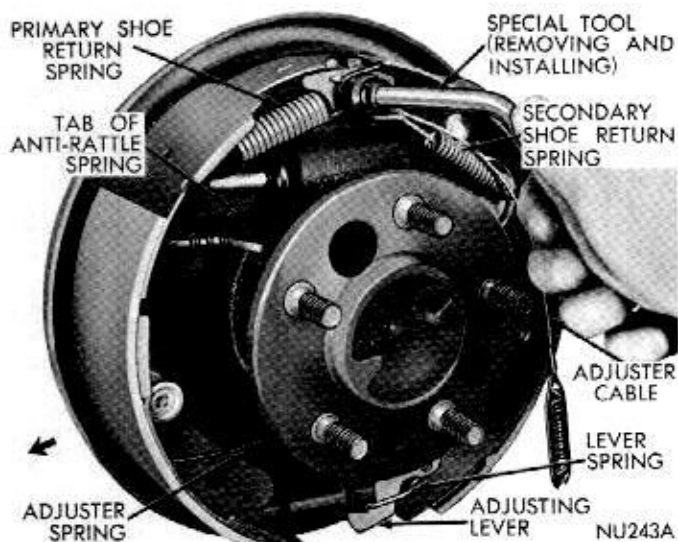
Removing or Installing Shoe Return Springs (Left Rear)
